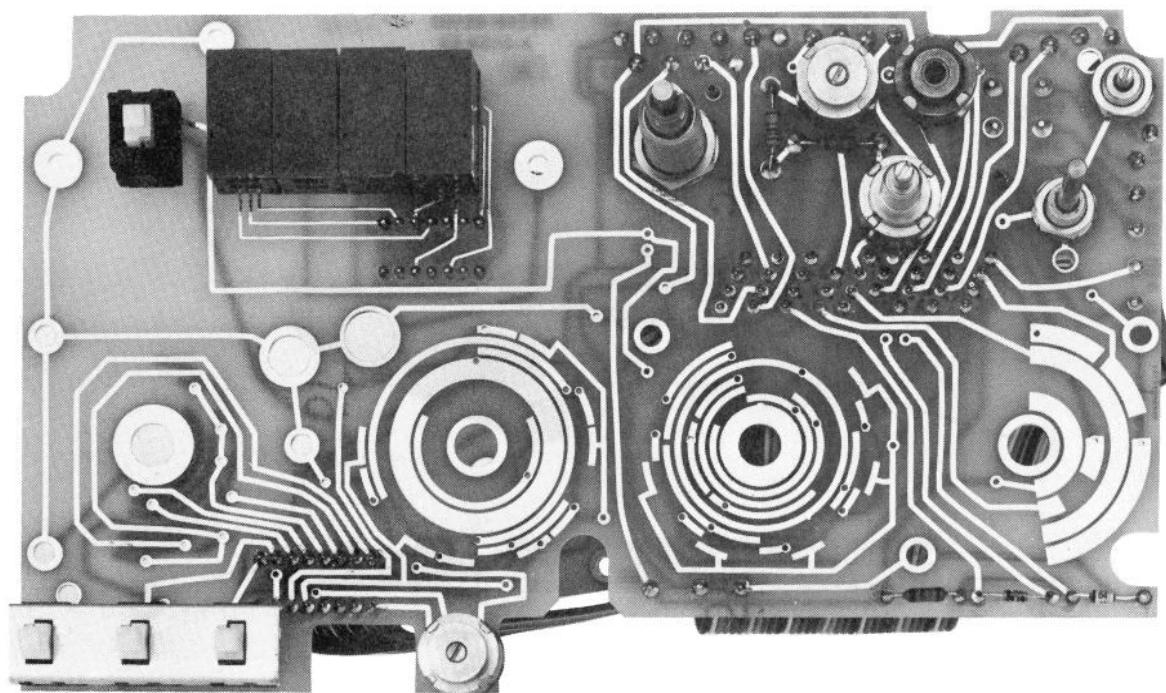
FRONT VIEW OF SWITCHBOARD ASSEMBLY A2A1
